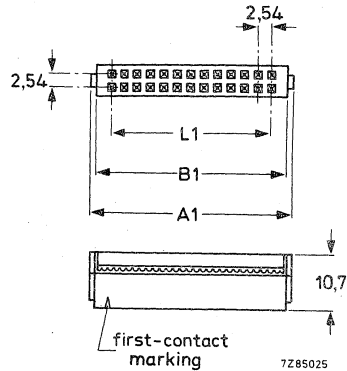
Cable connector without polarizing key; for dimensions A1, B1 and L1, see Table 2.
